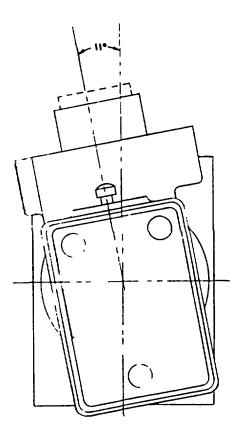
Pressure Switch Relief Module, Alignment of Outlet Housing to Adapter Body, End View
